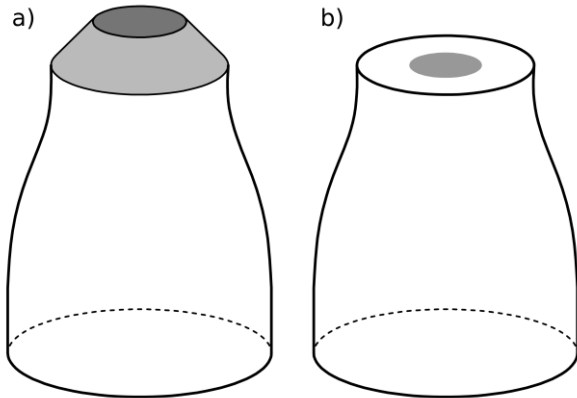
a) Cup-cone fracture pattern; b) Fracture pattern exhibited by eutectoid steel bars used for manufacturing prestressing wires.
